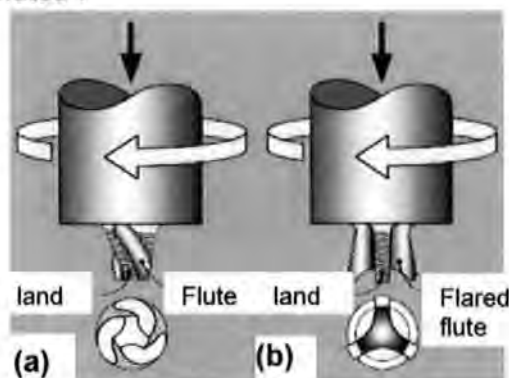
Triflute family of pin variants for friction stir welding. (a) MX Triflute™ for butt welding (b) Flared-Triflute™ with tip<sup>4</sup>.
